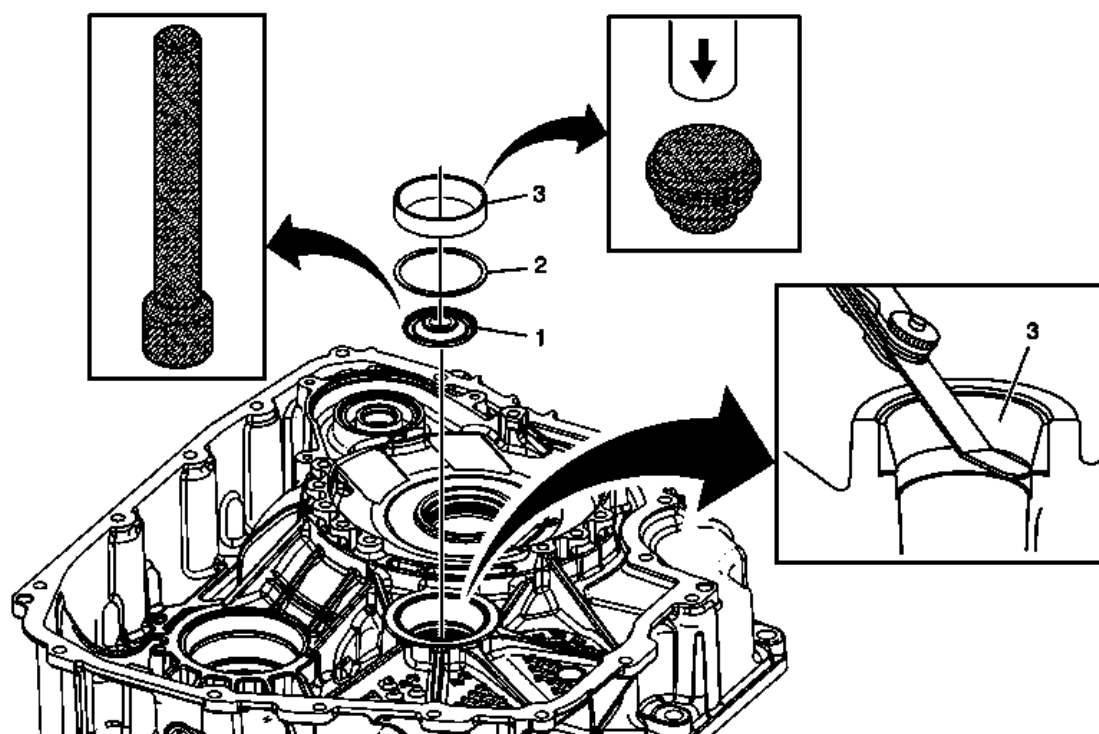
Identifying Front Differential Drive Pinion Bearing Cup, Washer & Lube Dam
